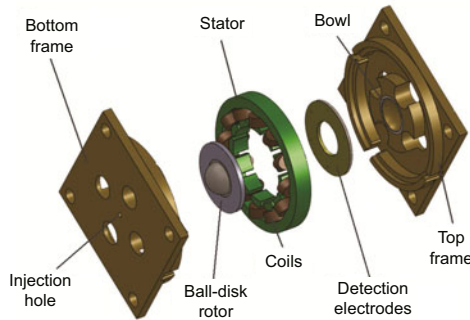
Assembly drawing of the mechanical structure of the gyroscope
